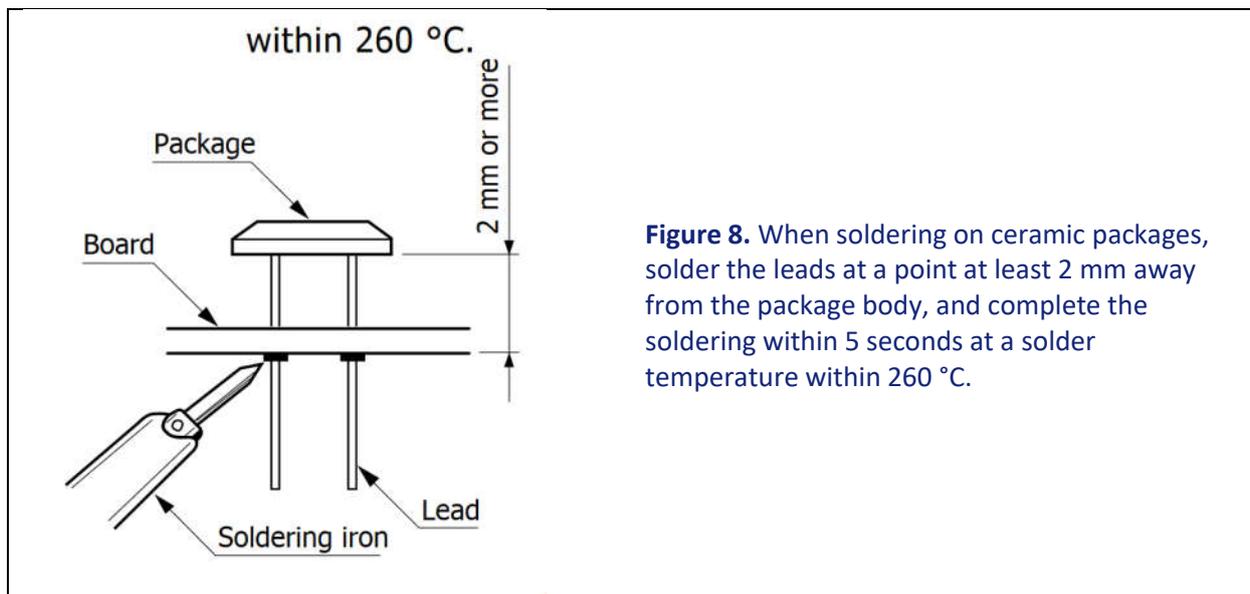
When soldering on ceramic packages, solder the leads at a point at least 2 mm away from the package body, and complete the soldering within 5 seconds at a solder temperature within 260 °C.
